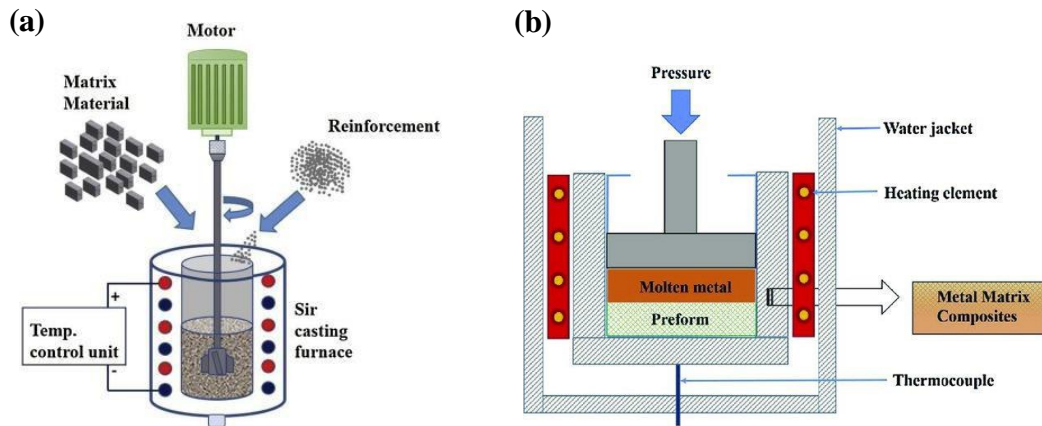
shows the (a) stir casting setup, (b) squeeze casting setup [101]
